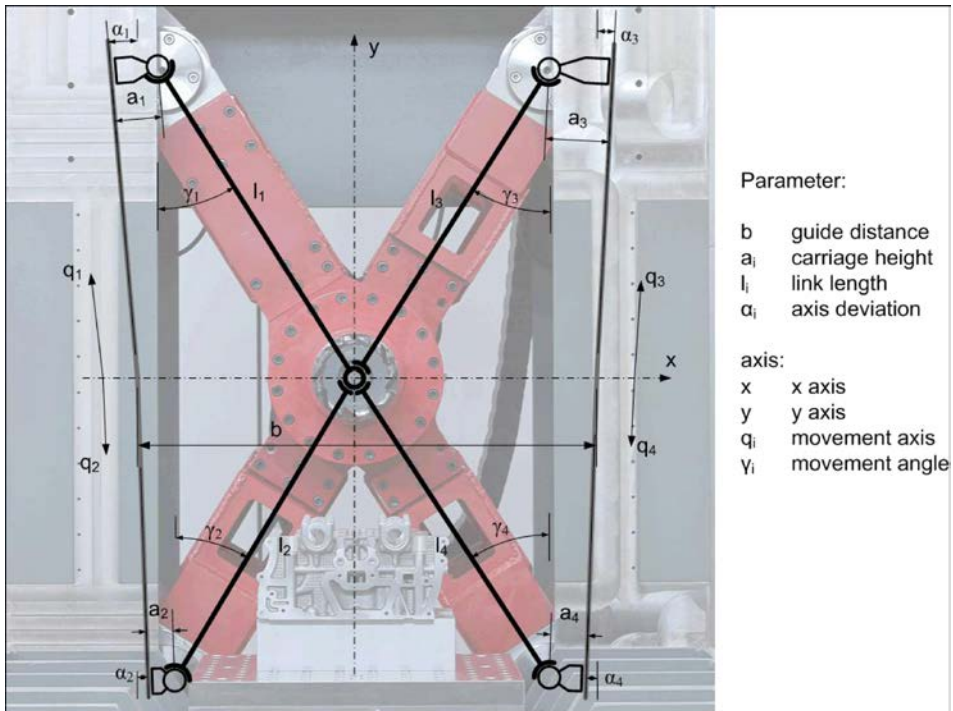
Machine tool structure of X-Cut and kinematic parameters.
